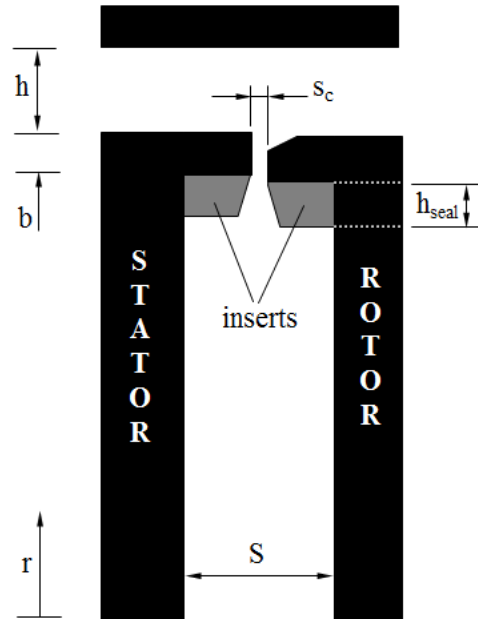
Axial-clearance seal with inserts for heat transfer tests
